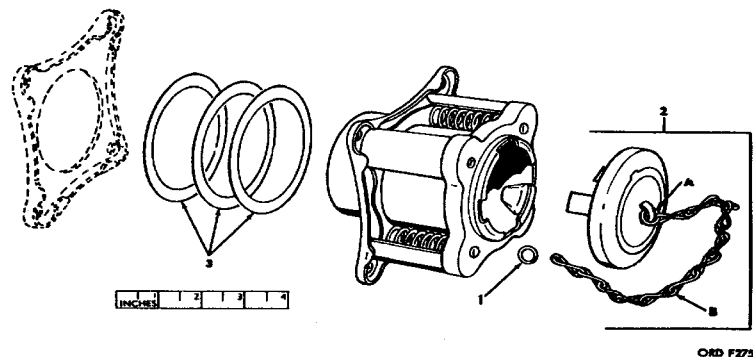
Pyrotechnic pistol mount M1--exploded view.
